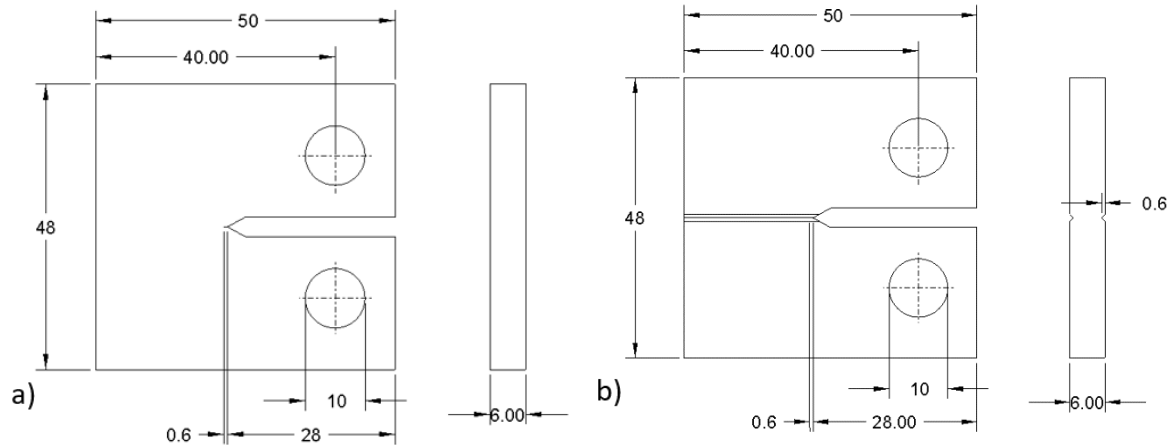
Dimensions of the CT specimen: a) without side-grooves, b) with side-grooves.
